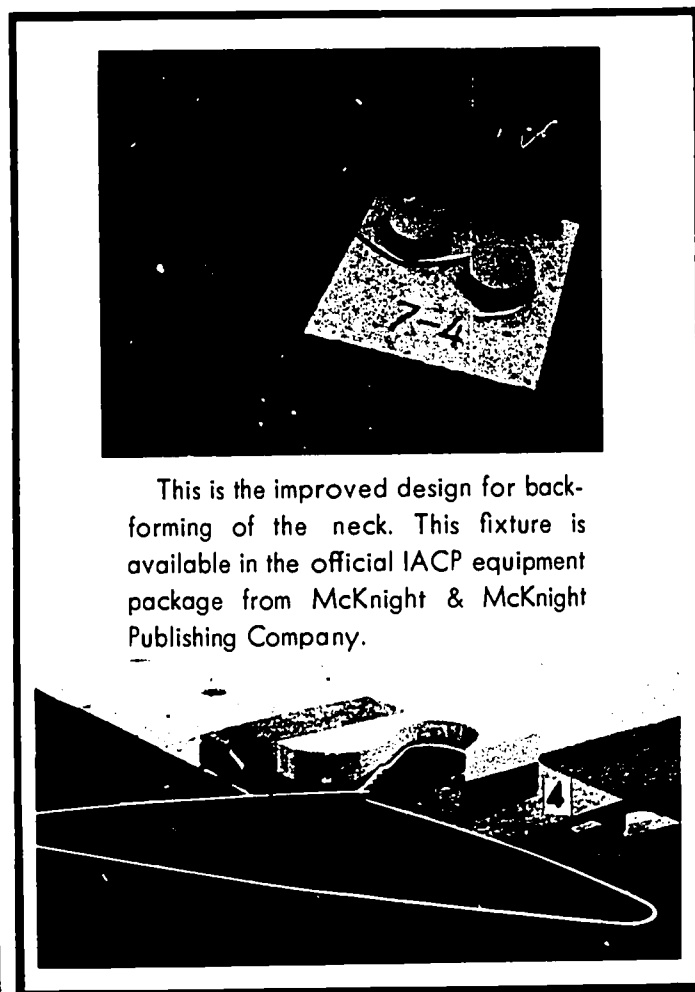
B-11. Position to Start Back-Form of Neck in No. 7-4 Fixture
